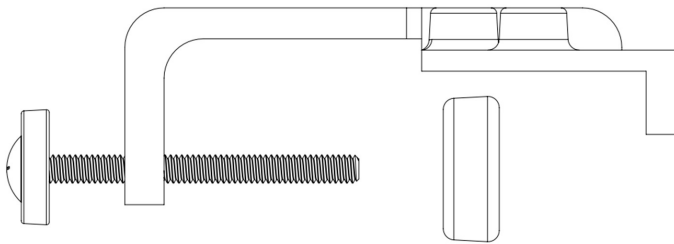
Side View of Exploded C-Clamp Arm and Carriage Bolt
